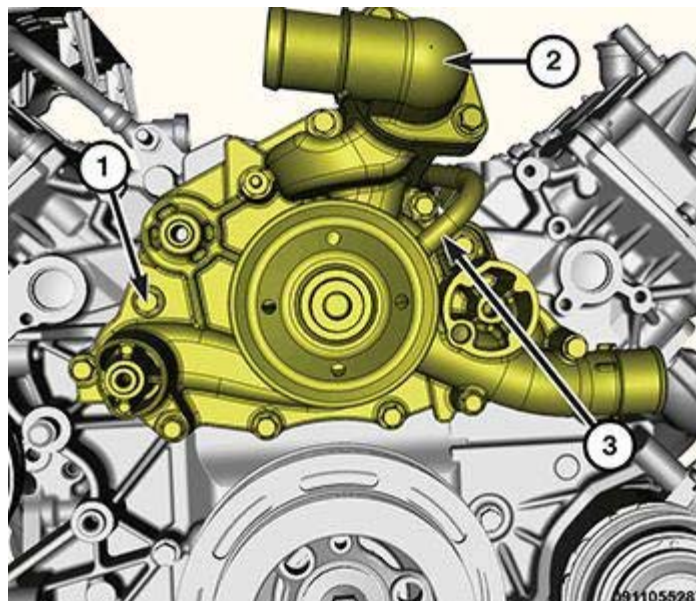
Water Pump Mounting Bolt & Thermostat Housing
